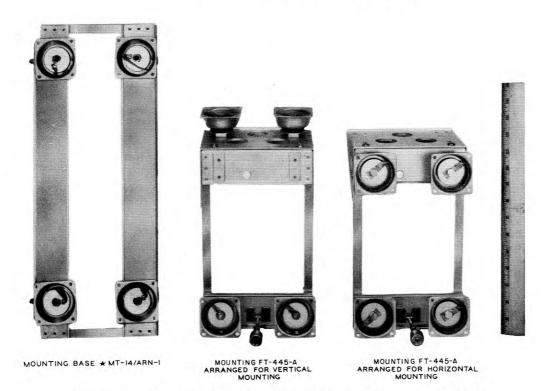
Mounting Base \*MT-14/ARN-1 and Mounting FT-445-A
